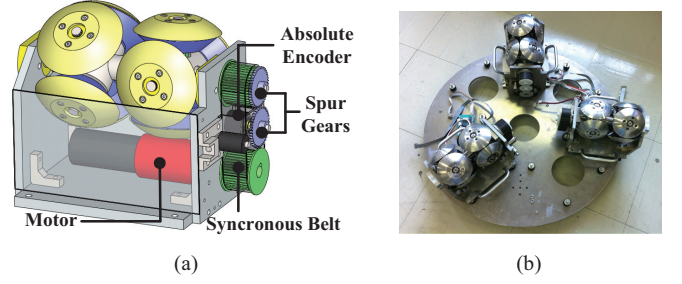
(a) CAD model of MY Wheel-II assembly. (b) prototype platform.
